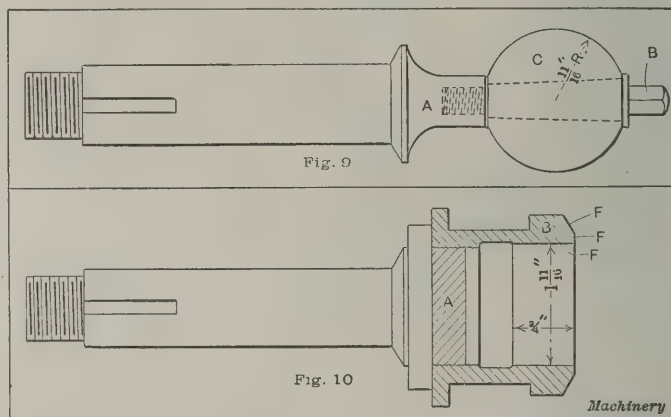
How the Balls are held for Grinding. Fig. 10. Method of holding Steering Post Cones on the Grinding Machine
